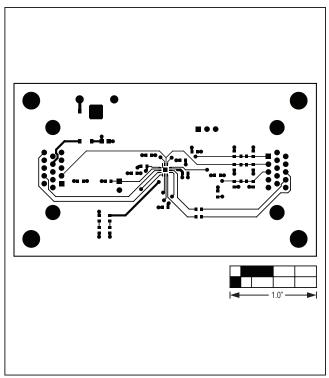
MAX14895E EV Kit PCB Layout—Component Side
